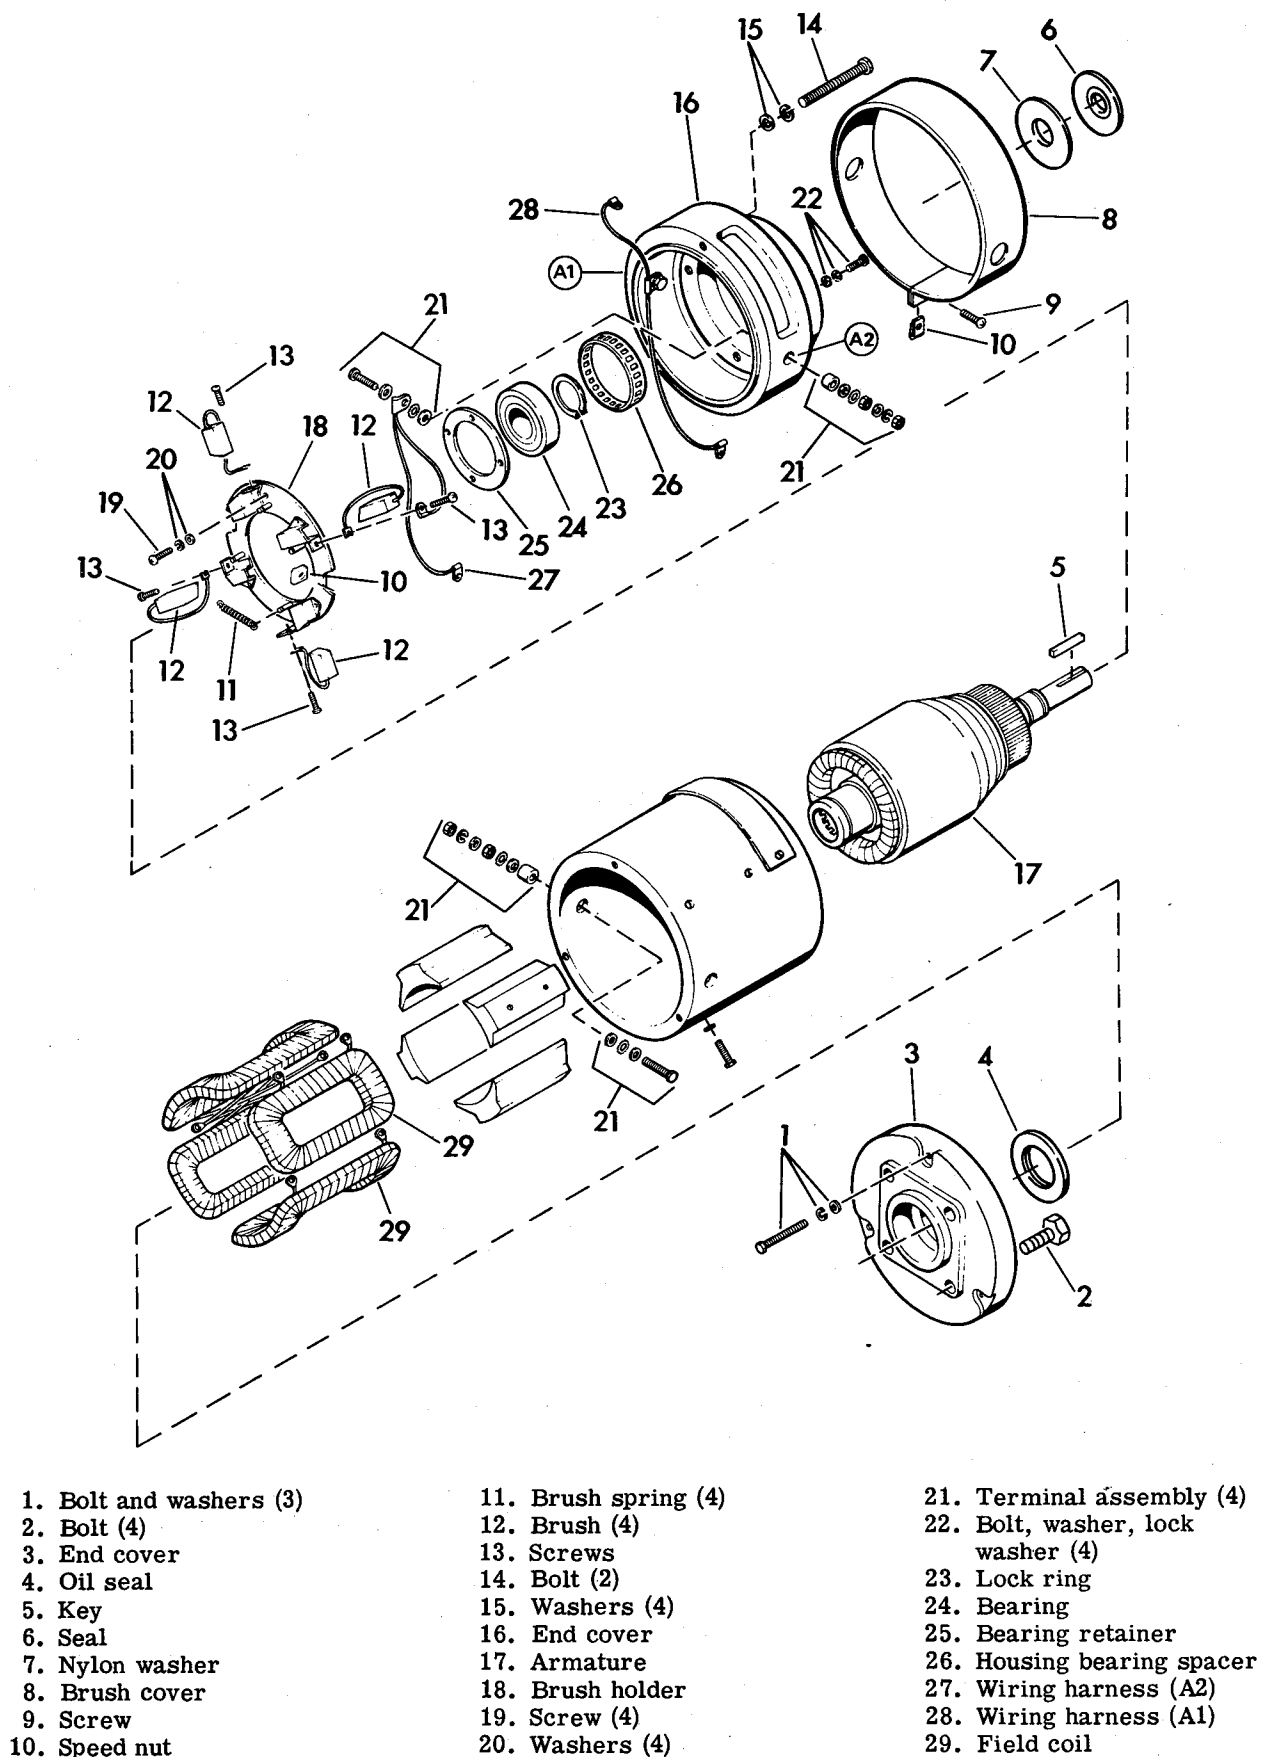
AMF Traction Motor - 1975 and Later DE, DE-3, DE-4 - Exploded View
